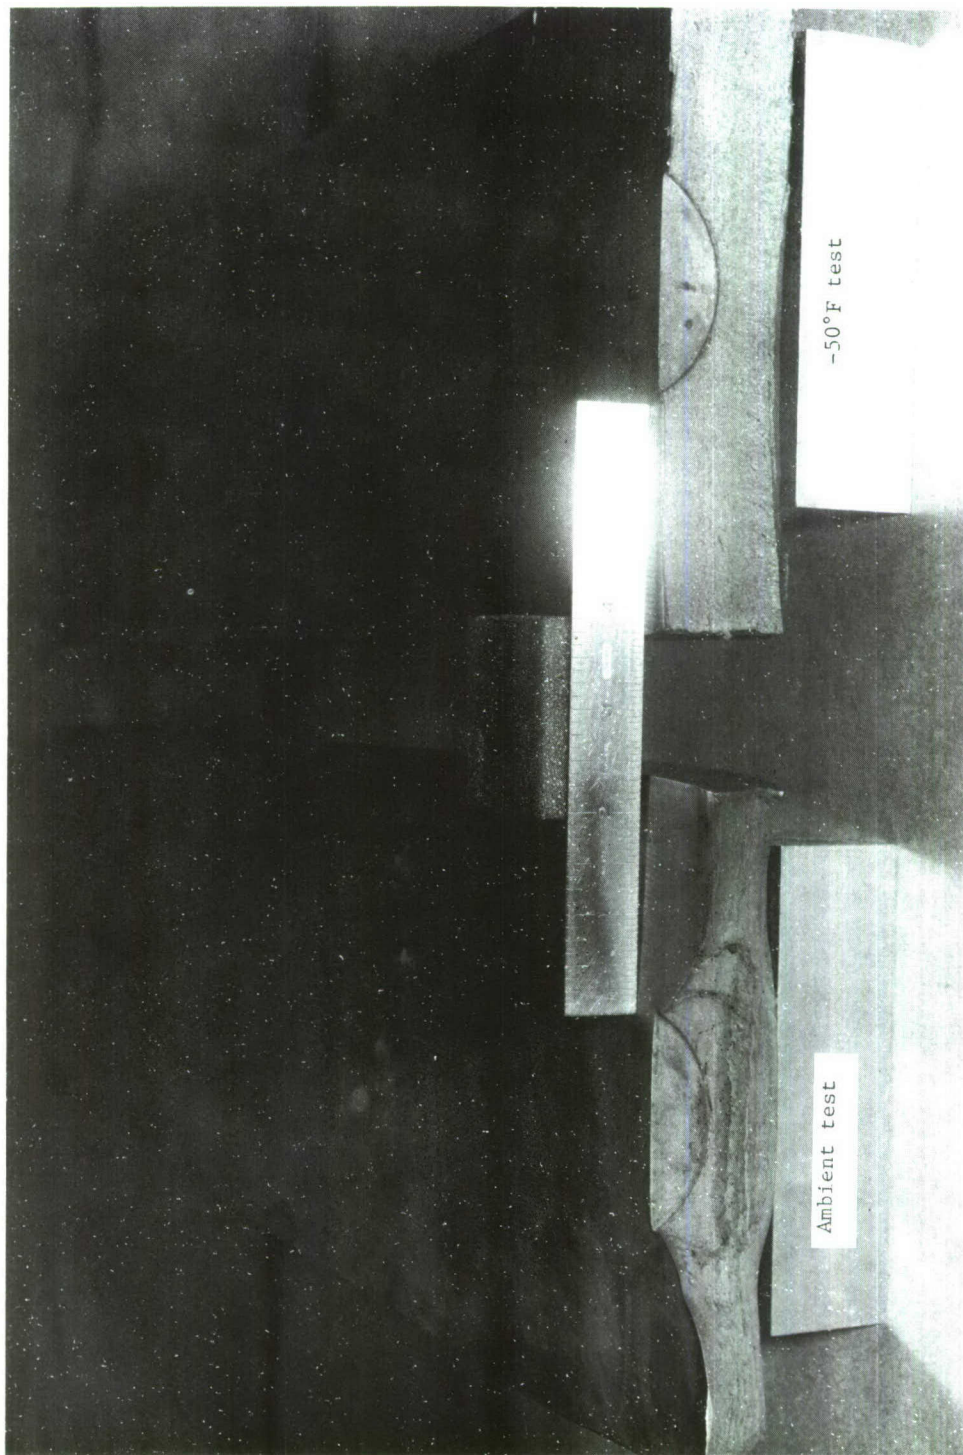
Fracture Surfaces from Ambient and -50°F Test Temperature
